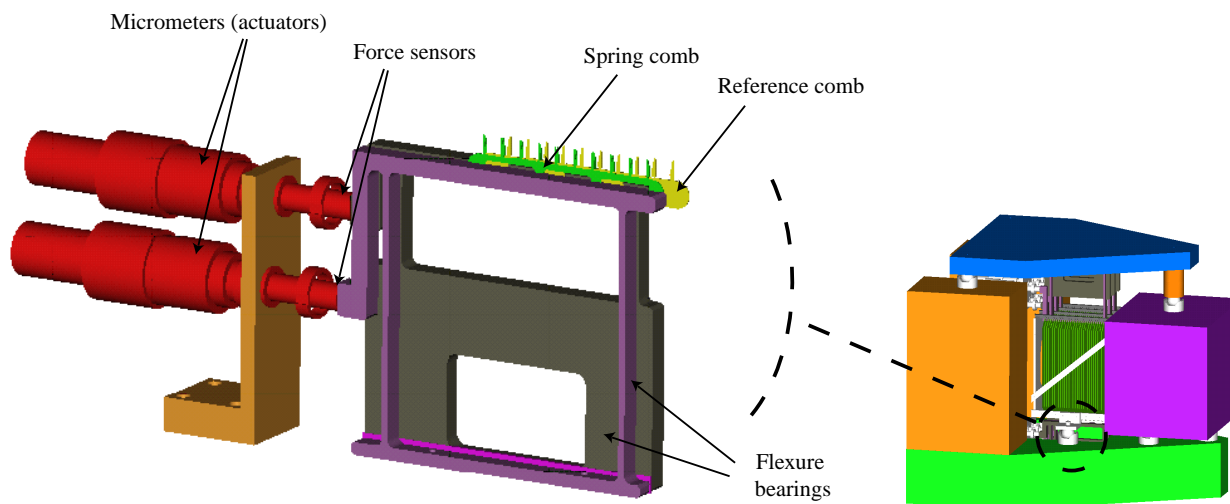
The flexure bearing assembly contains the microcombs, flexure bearings, force sensors, and micrometers.
